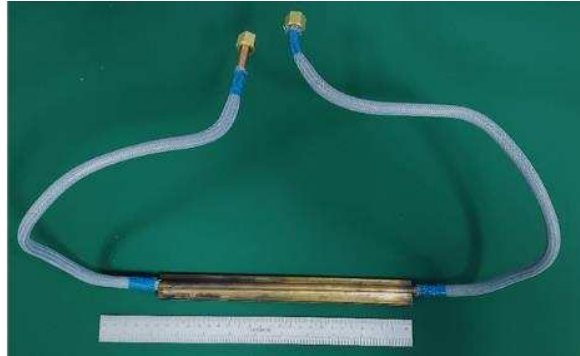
Work coil designed by TWI Ltd to be used in the SLS coupon manufacture using PCM technology.
